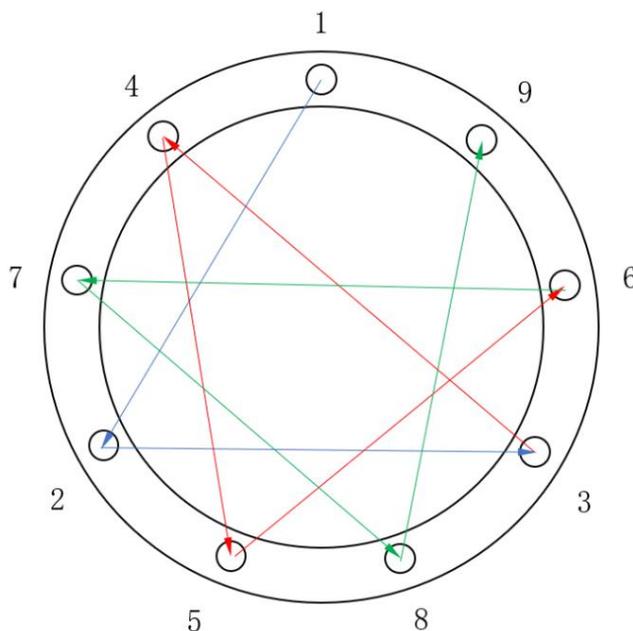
Sequence for tightening the screws for joining the upper and lower parts of the 20 L transfer standard
